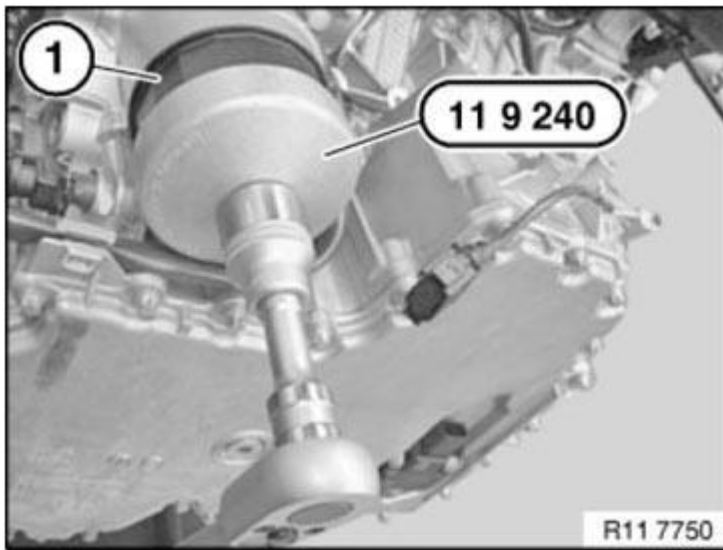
Removing Oil Filter Cover With Special Tool 11 9 240
